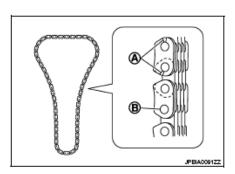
Identifying Timing Chain Crack And Wear Courtesy of NISSAN MOTOR CO., U.S.A.
